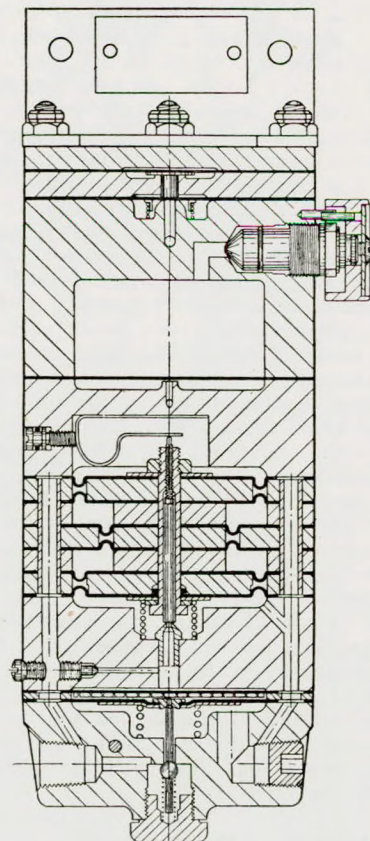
Sectional arrangement of "Nullmatic" control unit
